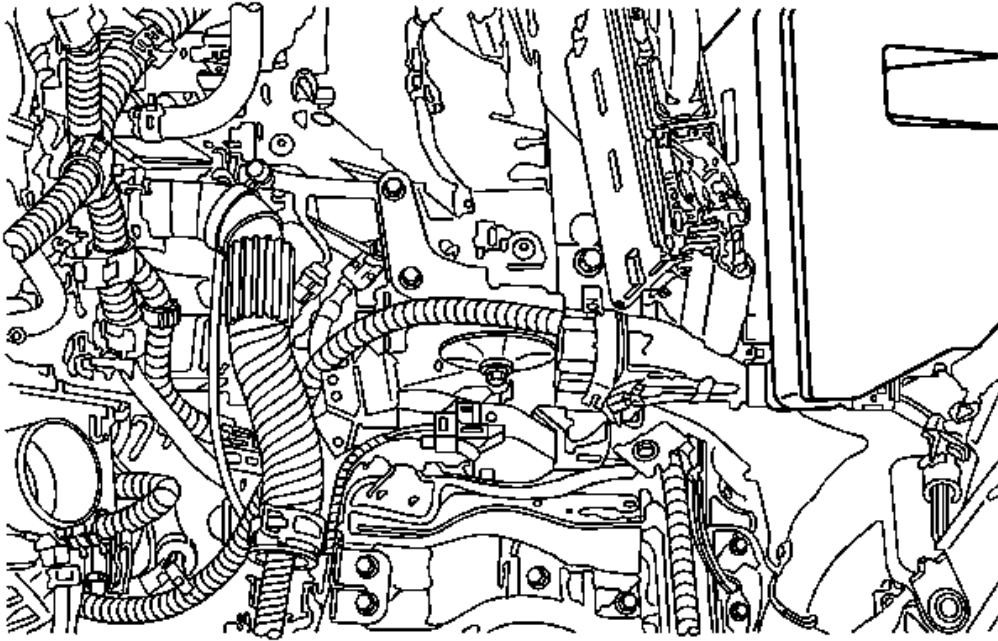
Identifying Engine Block Heater Harness Plug Bundle
